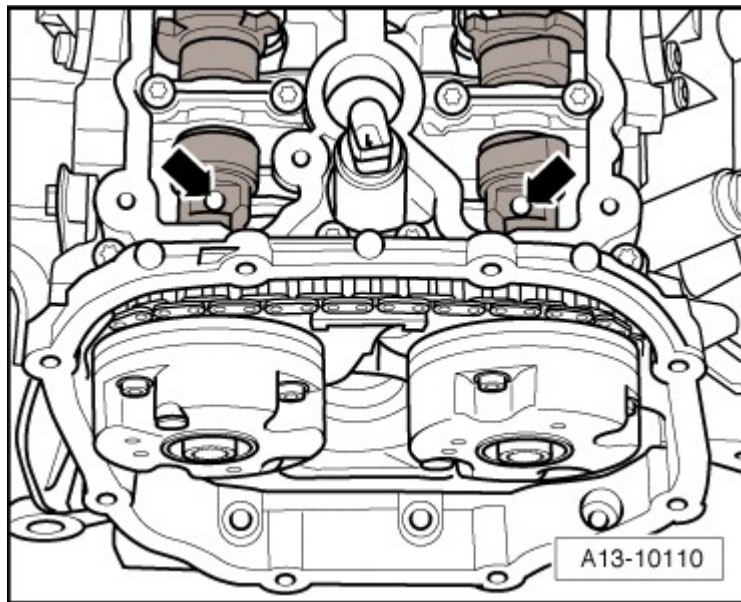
Identifying Threaded Holes In Camshafts Must Face Upward
